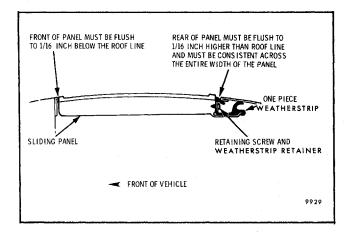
Proper Front and Rear Sliding Panel Adjustment -C Styles Shown, E and K Similar
